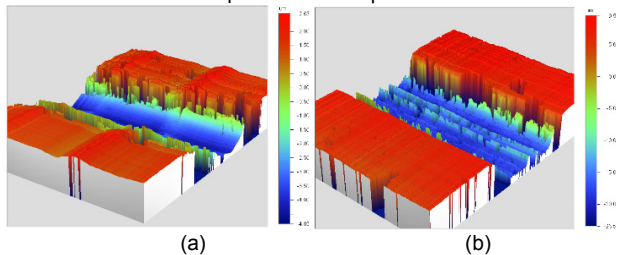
WLI images on (a) 20000 RPM and (b) 100000 RPM on 200 μm thick Ni workpiece using 400 μm end mill cutter
